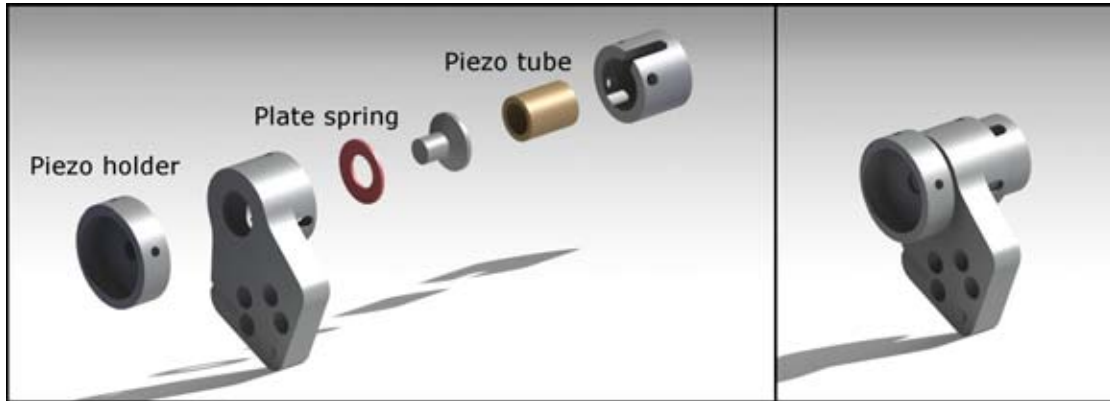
CAD drawings of the holder designed to mount a mirror on the piezoelectric actuator without glue. The mirror holder is clamped to the piezoelectric tube with the help of a plate spring. To not damage the piezoelectric material during assembling it is important that no shear forces or radial load is applied to the piezoelectric tube.
